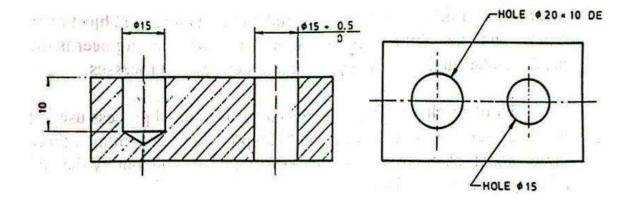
illustrates methods of dimensioning holes using both end and side views
